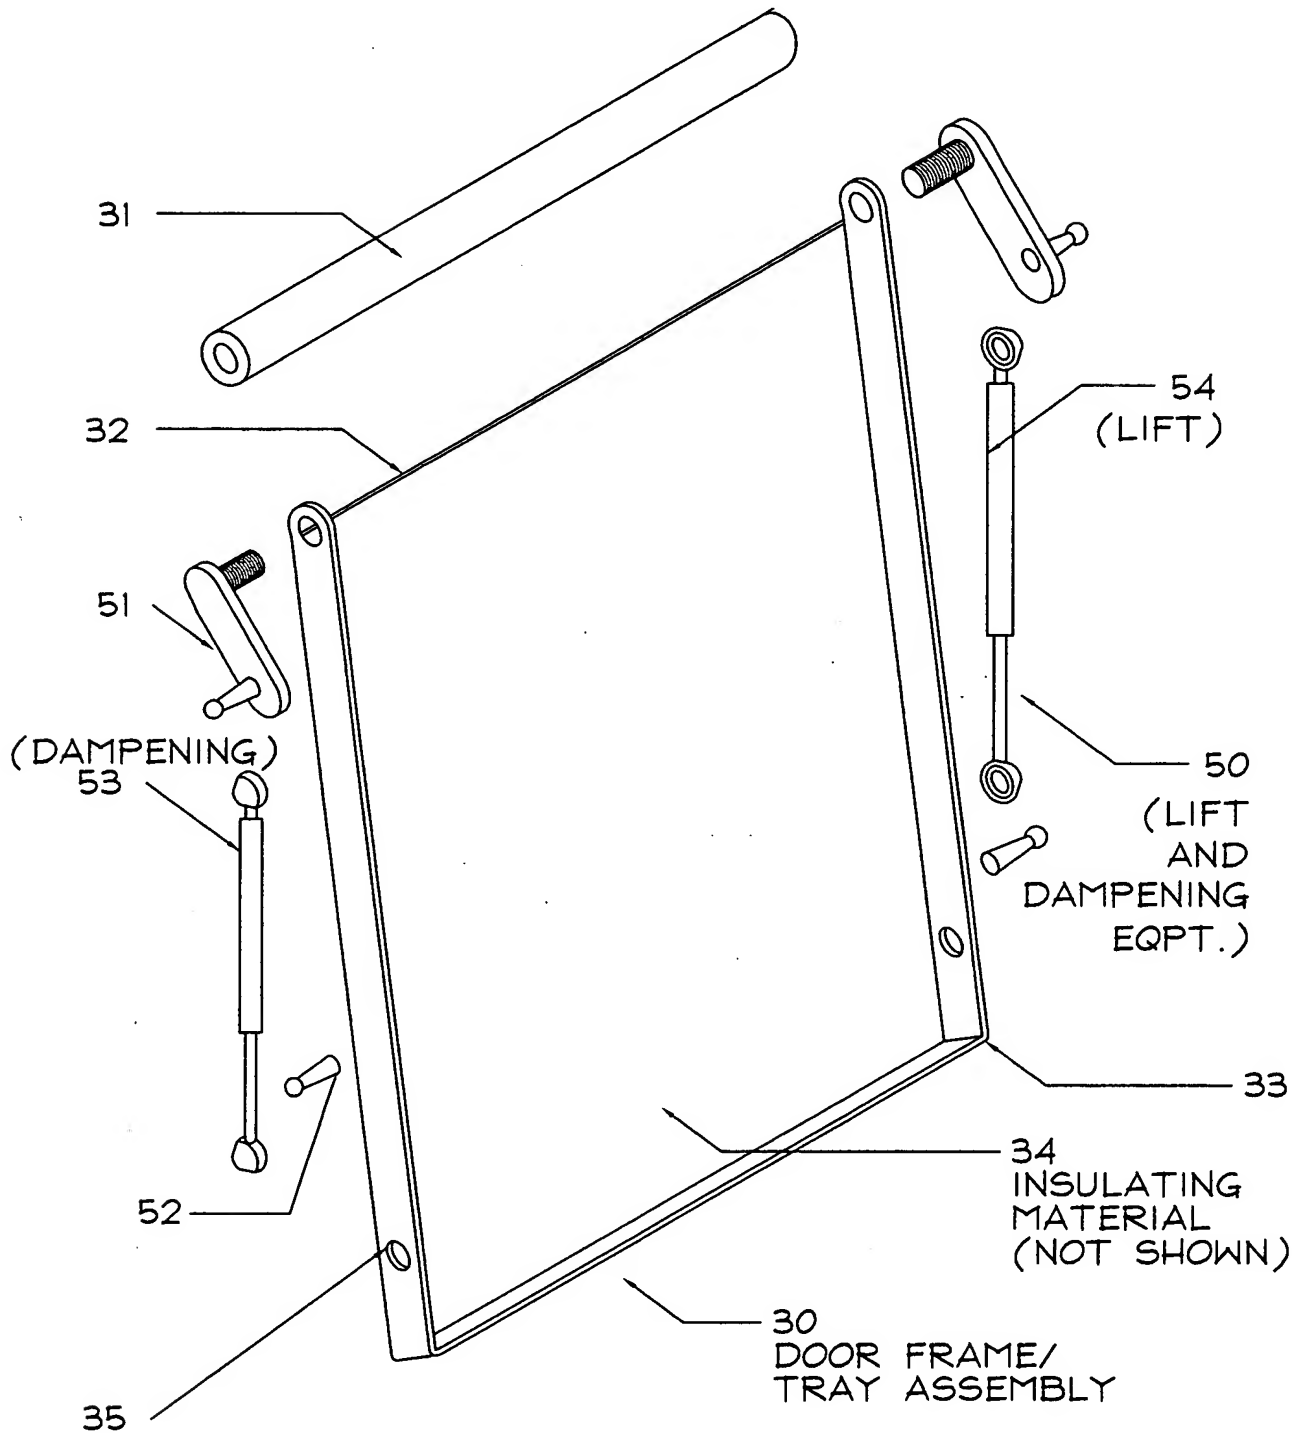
DOOR FRAME/TRAY ASSEMBLY
